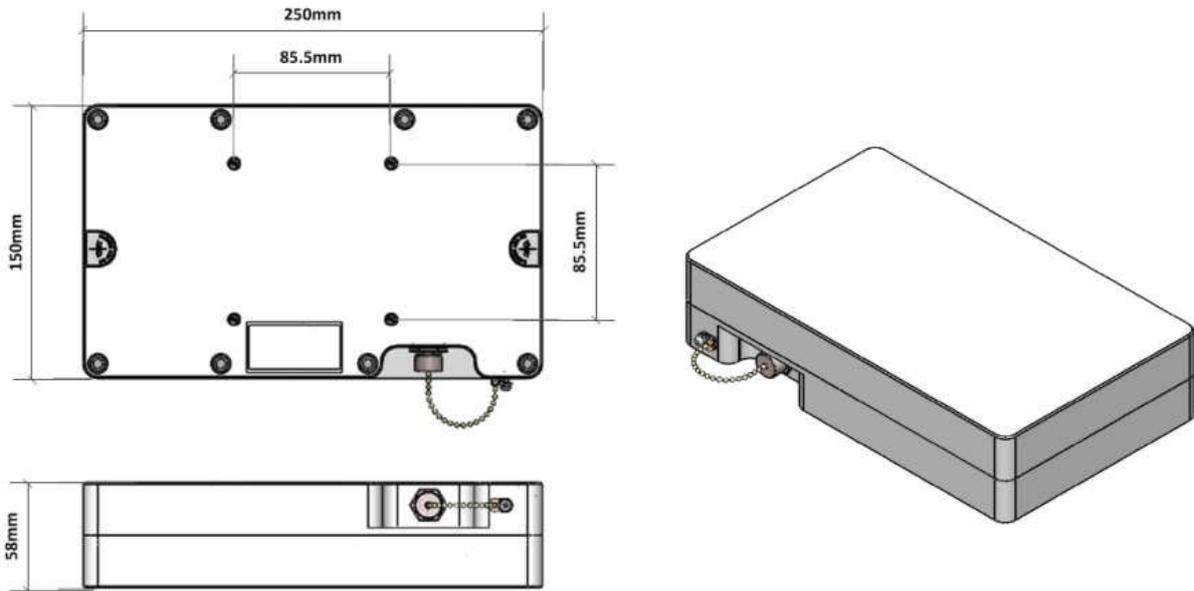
SR-500F/SR-500I/SR-250F/SR-150F Mechanical Dimensions and Mounting Holes
